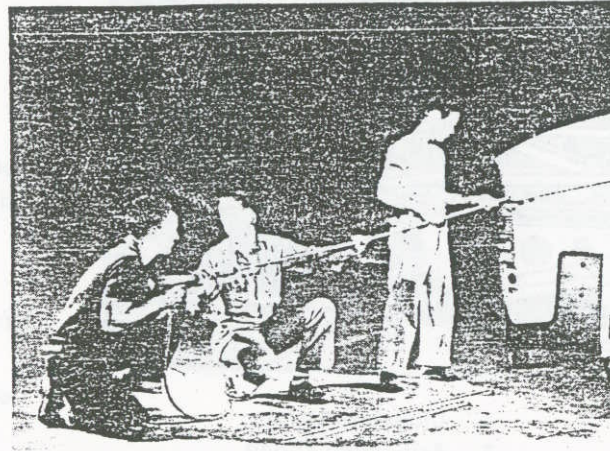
Driving Aileron Hinge Wire Using Air Gun Set
